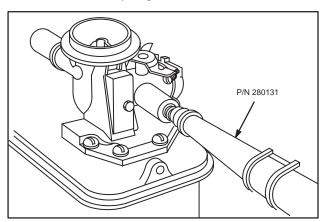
ASSEMBLING PRESSED-IN VALVE
